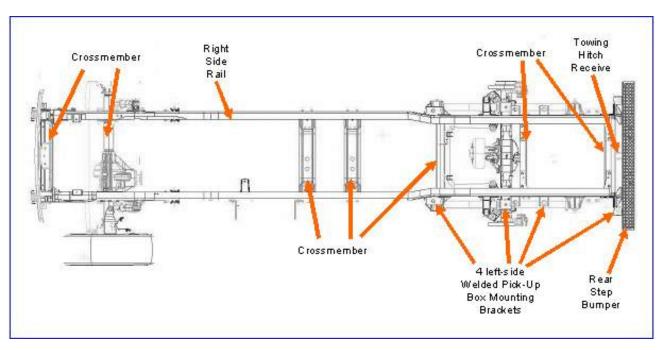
Plan View of Frame Rails, Crossmembers, and Pick-Up Box Mounting Brackets; with Rear Step Bumper
